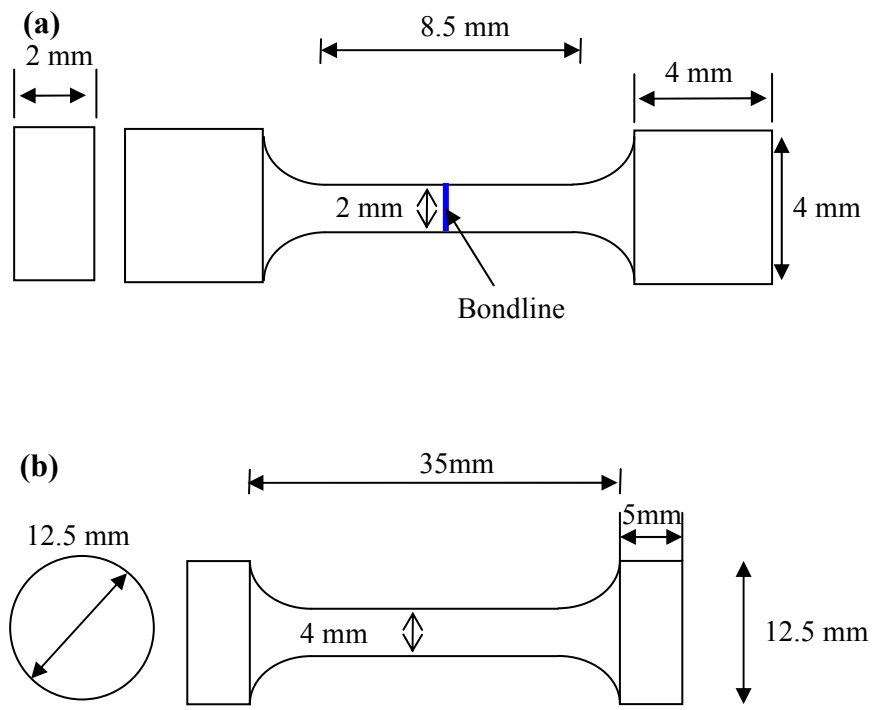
Geometry of (a) tensile test specimen and (b) creep test specimen
